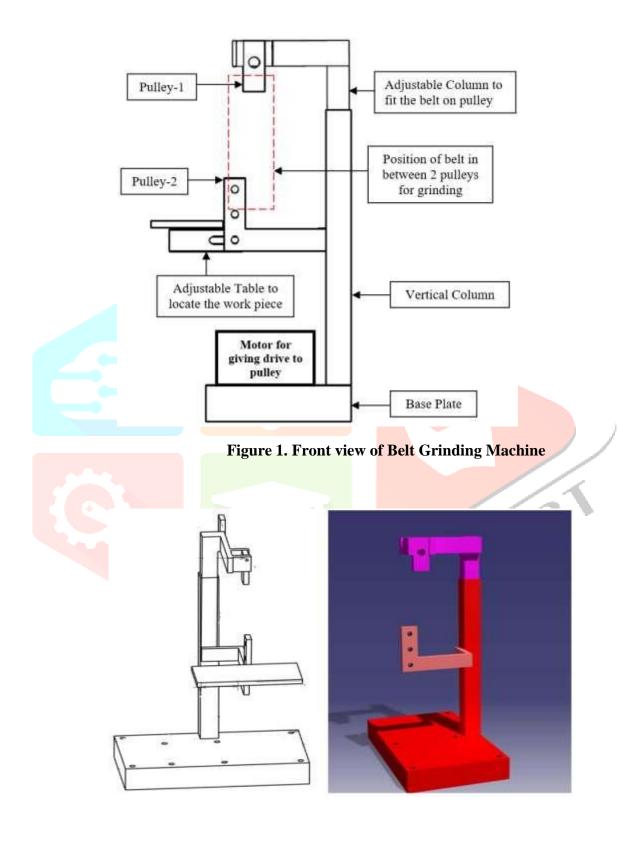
3D modelling of Belt Grinding Machine in CATIA
